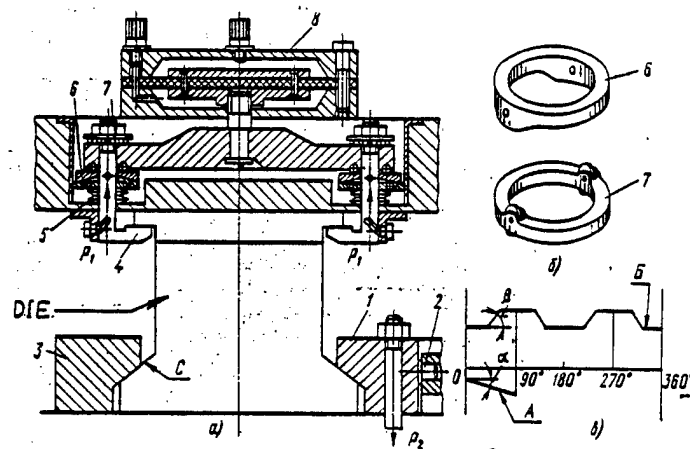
Device for Attachment of Dies (a); Cam and Push Rod (b); Scanning of Cam Sections and Spiral Groove of Fastener (c)
